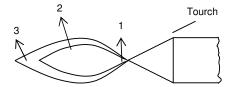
Establishment of Flame in Oxy-acetylene Welding
